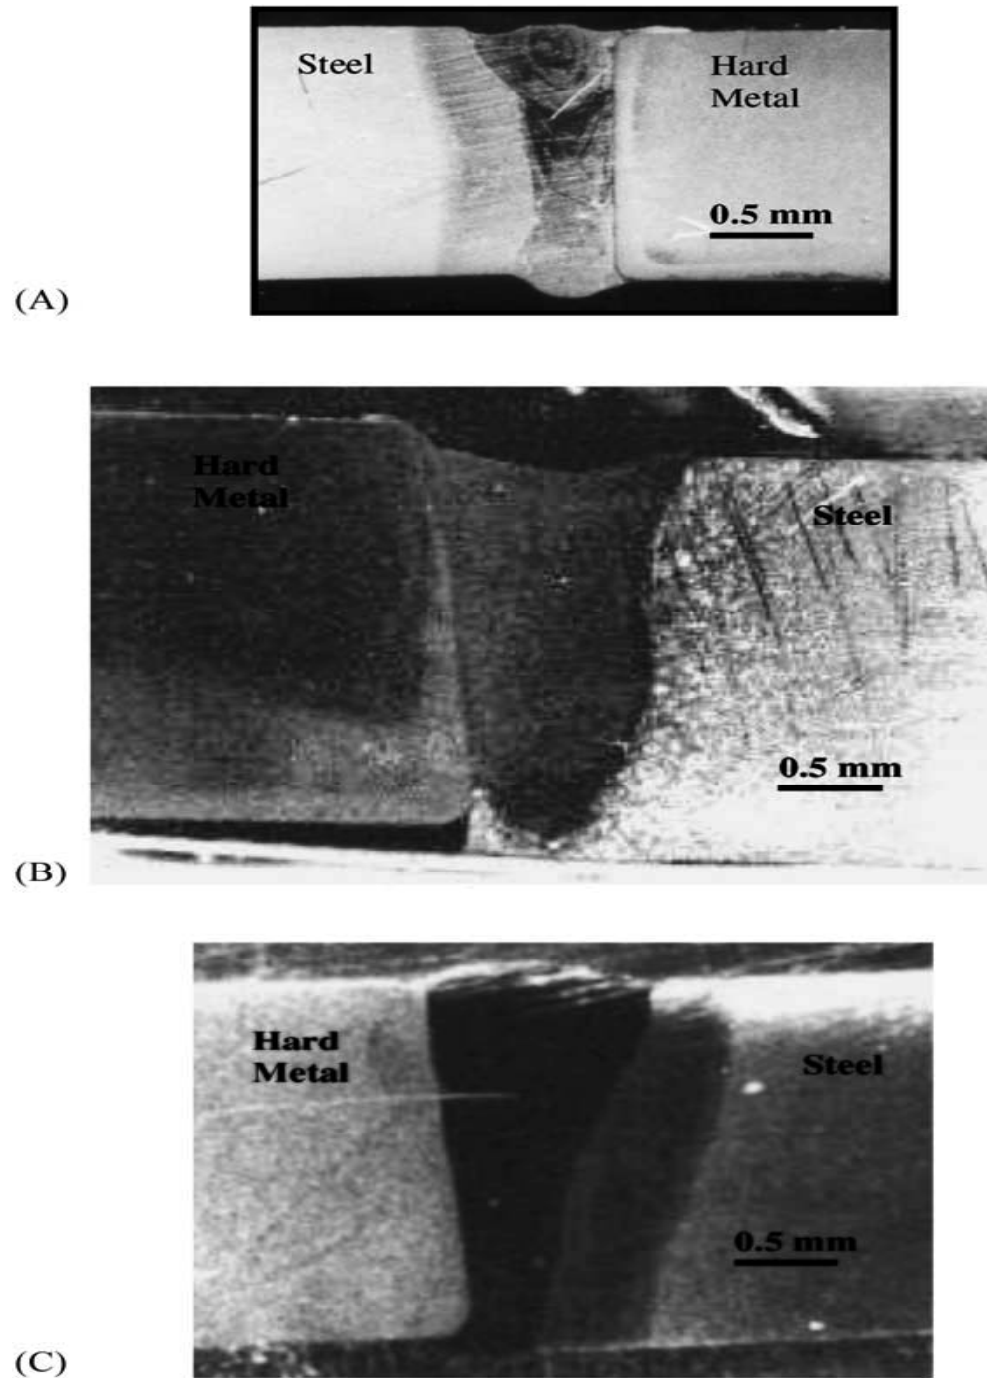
(A) K10 sample welded with (cw) Nd:YAG laser, $t_w = 0,15$ mm (macro analysis); (B) K40 sample welded with (pw) Nd:YAG laser, $t_w = 0,15$ mm (macro analysis); (C) K40 sample welded with (cw) CO₂ laser, $t_w = 0,1$ mm (macro analysis) (Costa et al., 2003)
